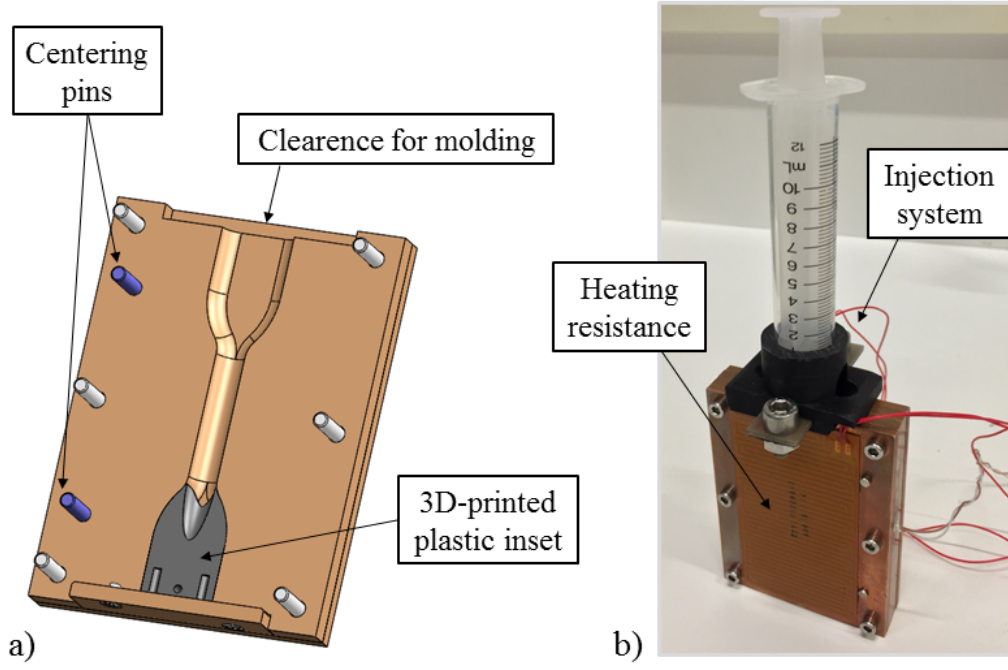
a) CAD drawing of the open mold (containing a sectional view of the lower 3D-printed plastic inset used for the fabrication of samples with nearly ellipsoidal MRE body). b) Picture of the mold assembled for the injection of the MRE material, showing the heating resistance of the external plate.
